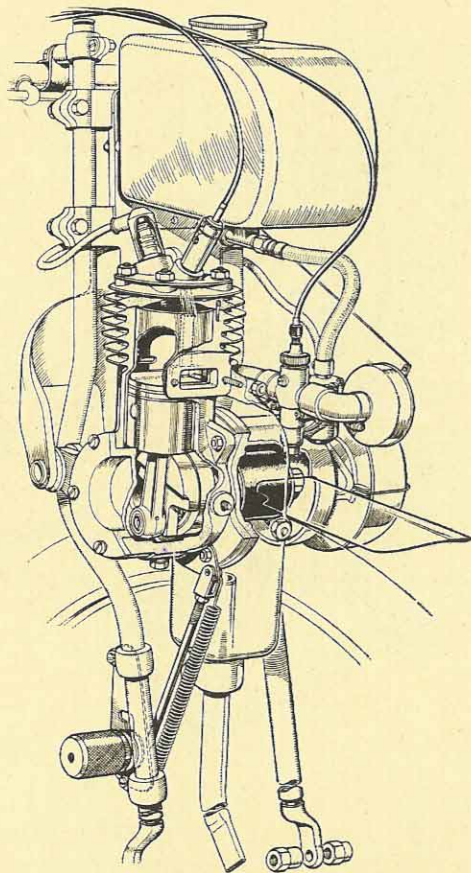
Mounted over the front wheel on a shock-absorbing sub-frame, the Mocyc drives the front tyre by roller. The sub-frame is attached to the handlebar at the top and the wheel spindle at the bottom, thus reducing the loading on the front fork. The engine is a two-stroke of the flat-topped-piston type with a capacity of 49 c.c.
